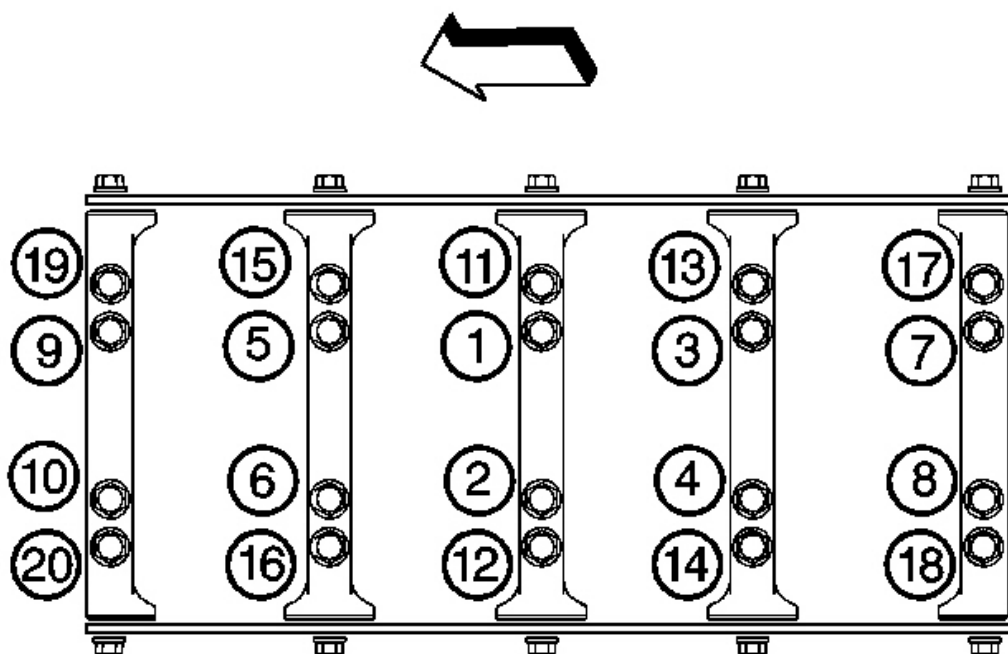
Identifying Main Cap Bolt Hole Tightening Sequence
